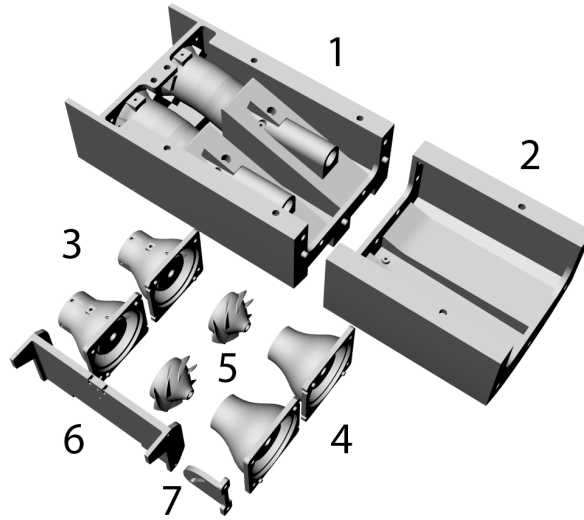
3D printed waterjet tunnels (1 and 2), impellers (5), nozzles (3 and 4), trim tab (6) and a centre piece (7), which allowed the adjustment of the trim tab to different angles.
